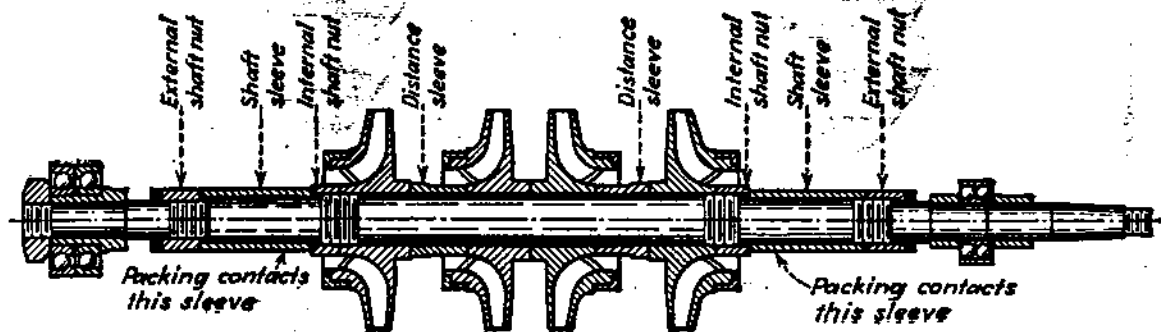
Section of a four-stage pump rotor, identifying various sleeves and shaft nuts.
